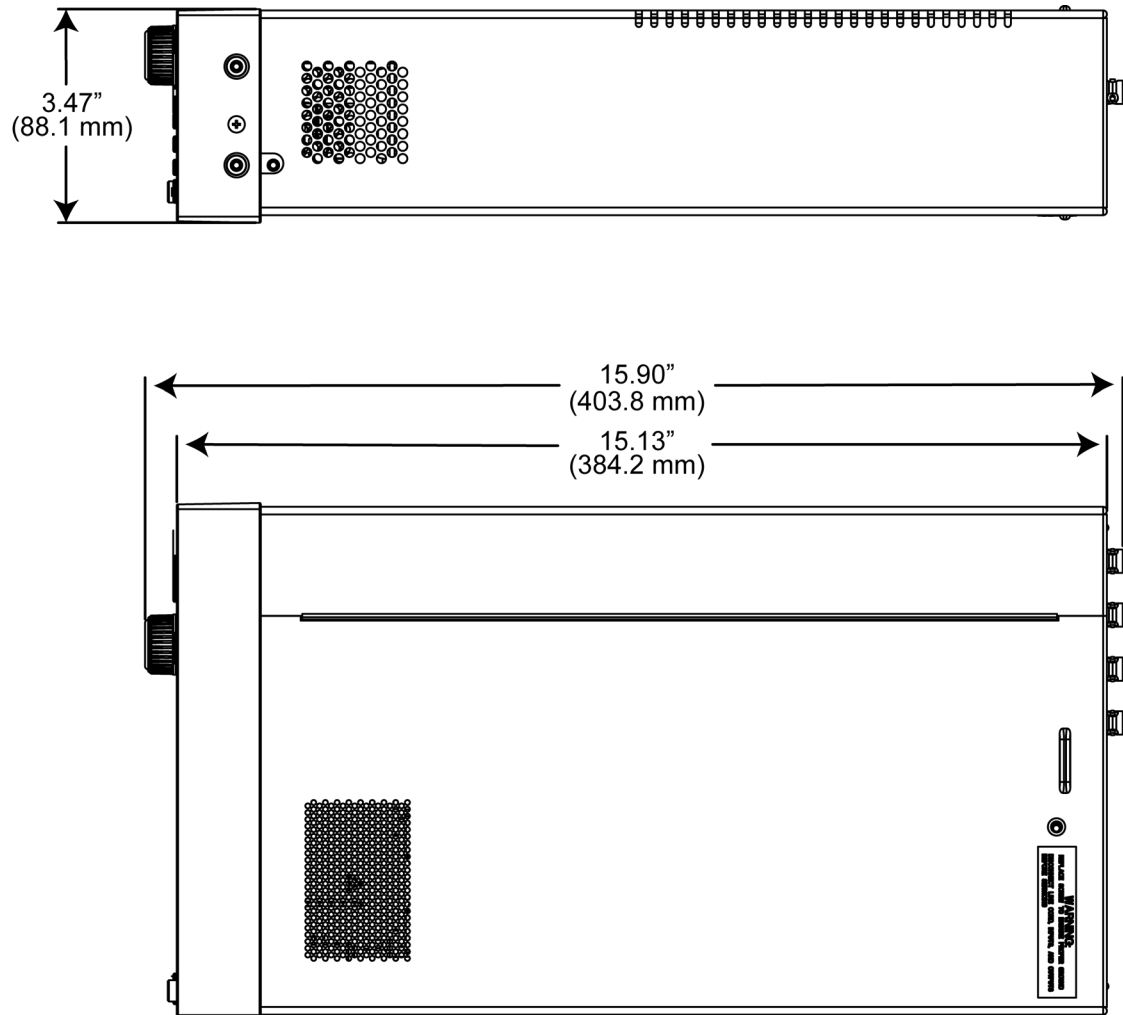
Model 2450 top and side dimensions with handle and bumpers removed
